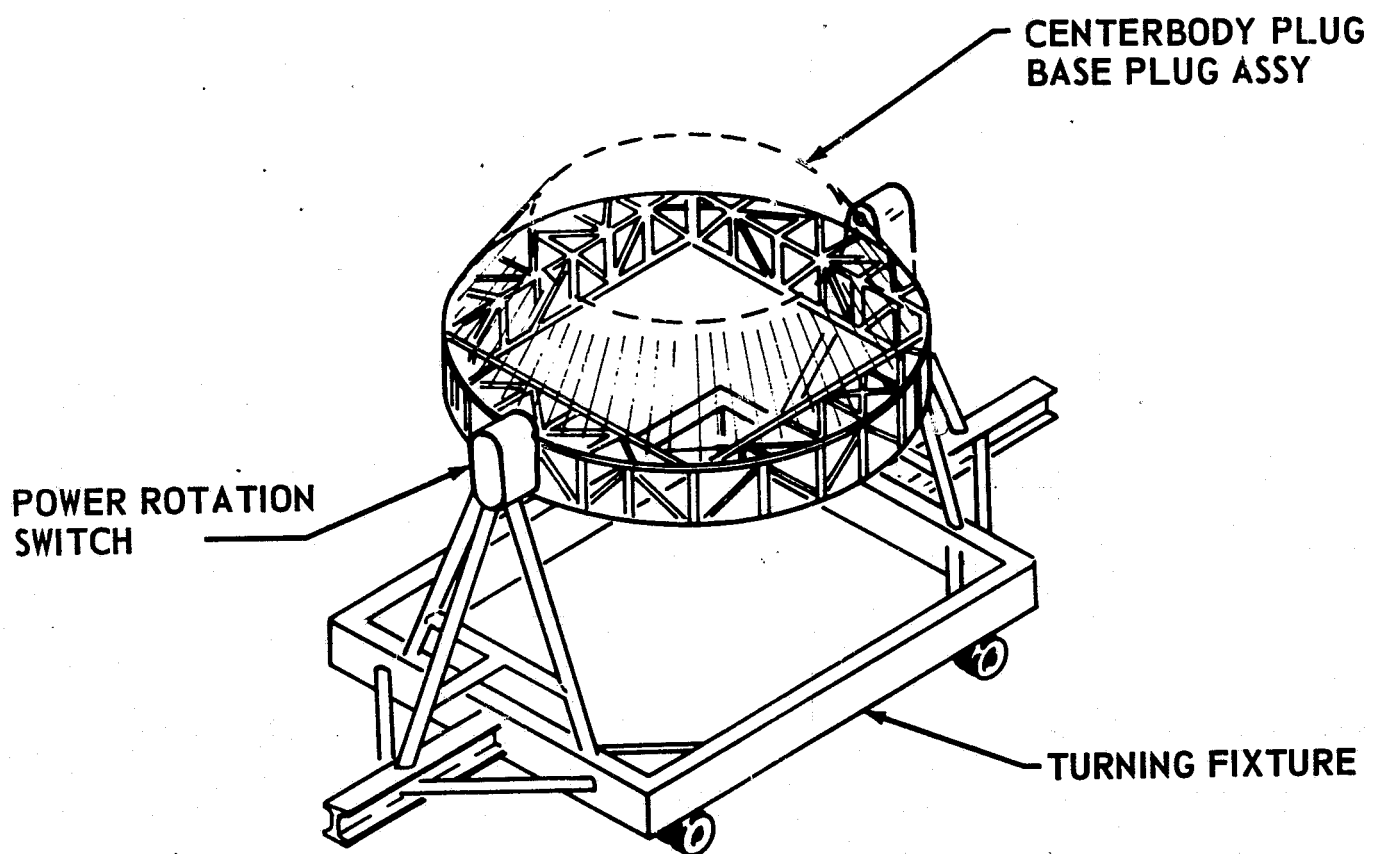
BASE PLUG INVERTING TOOL
